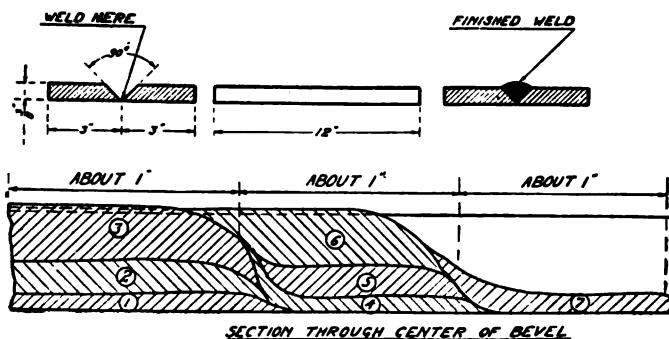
PROGRESSIVE STEPS IN FILLING OF BEVEL
